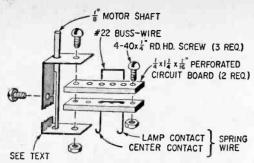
Wiper arm of motor makes contact between center ring of commutator and the lamp contacts with spring-wire brushes.
